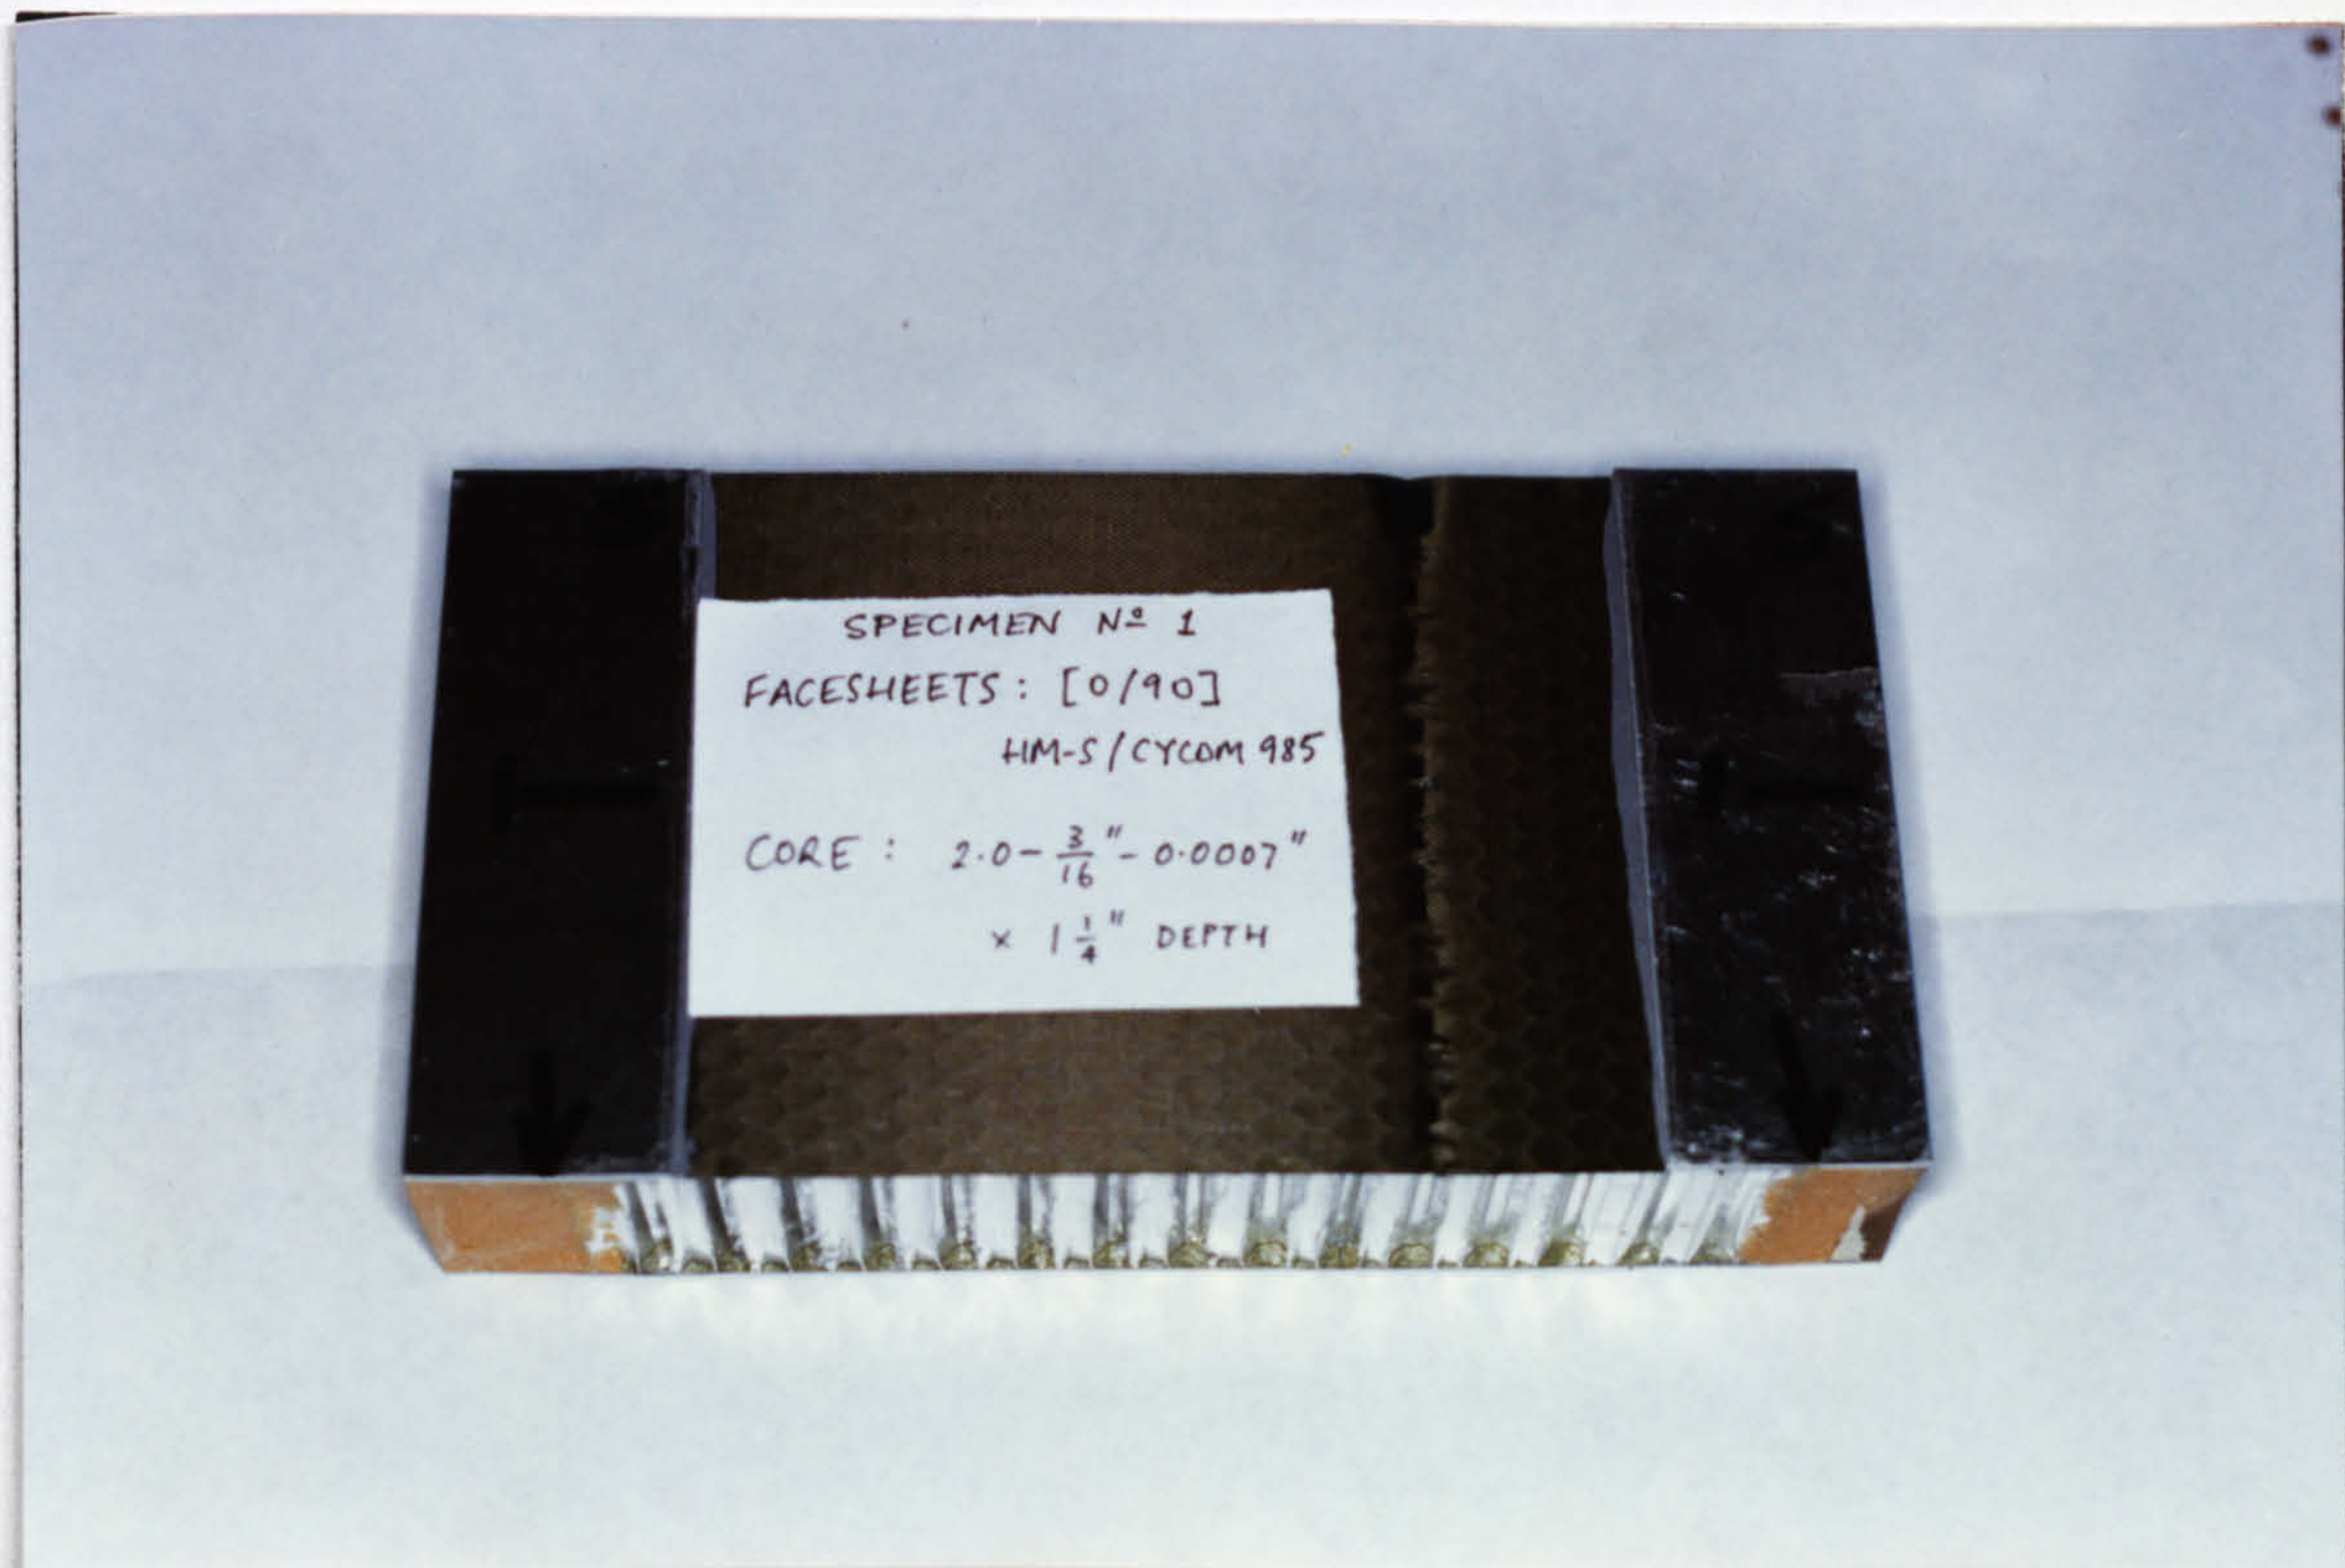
[0/90] FACED SPECIMEN No. 1 FAILURE MODE
